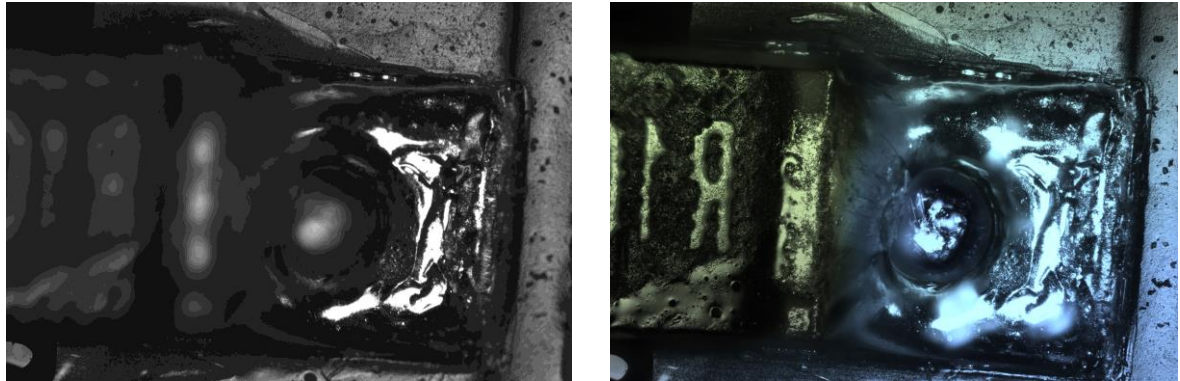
Resistor through hole soldered on a PCB a) before and b) after focus stacking, colorized to increase 3D character
